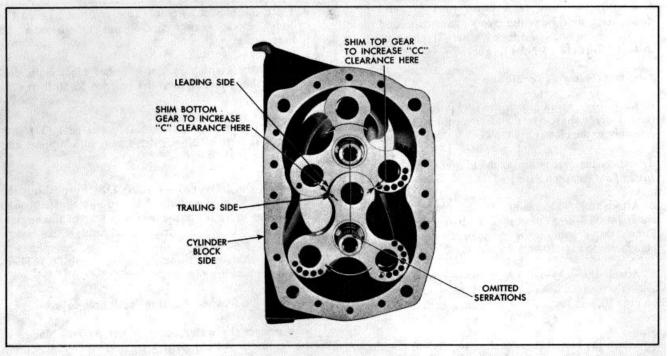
Diagram Showing Proper Location of Shims for Correct Rotor Lobe Clearances.
